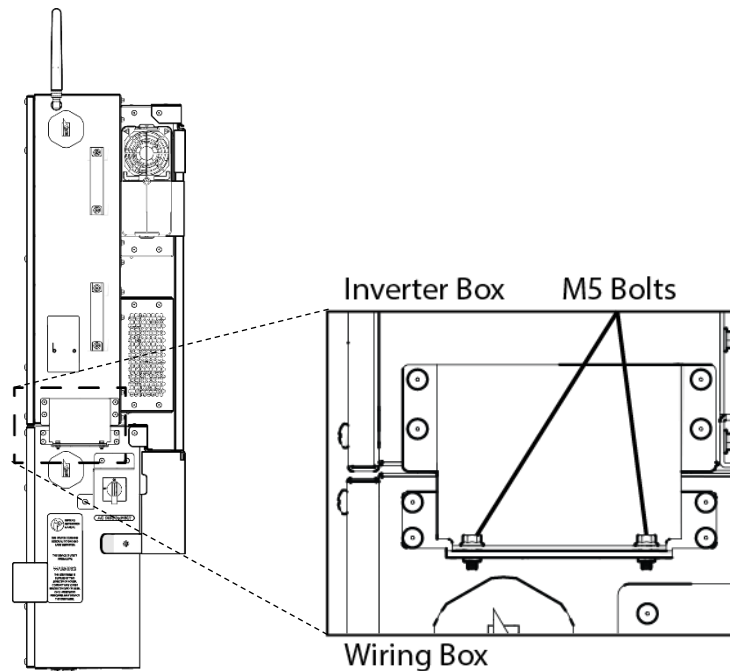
M5 Connecting Bolts (Right Side Shown)
